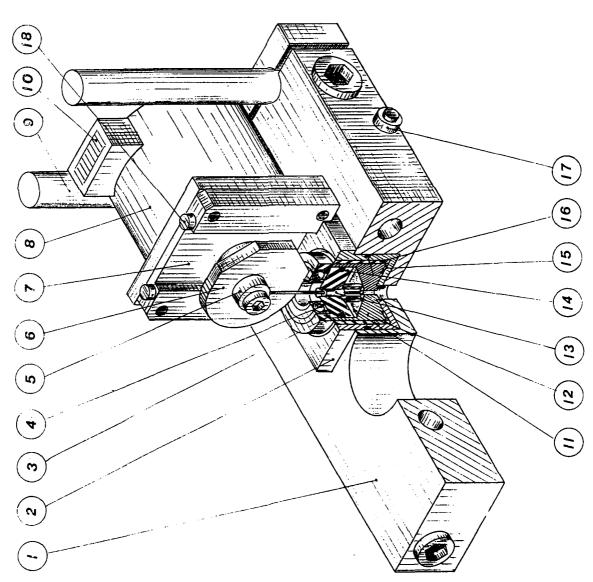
Isometric Drawing of Powder Lubricant Feeder
